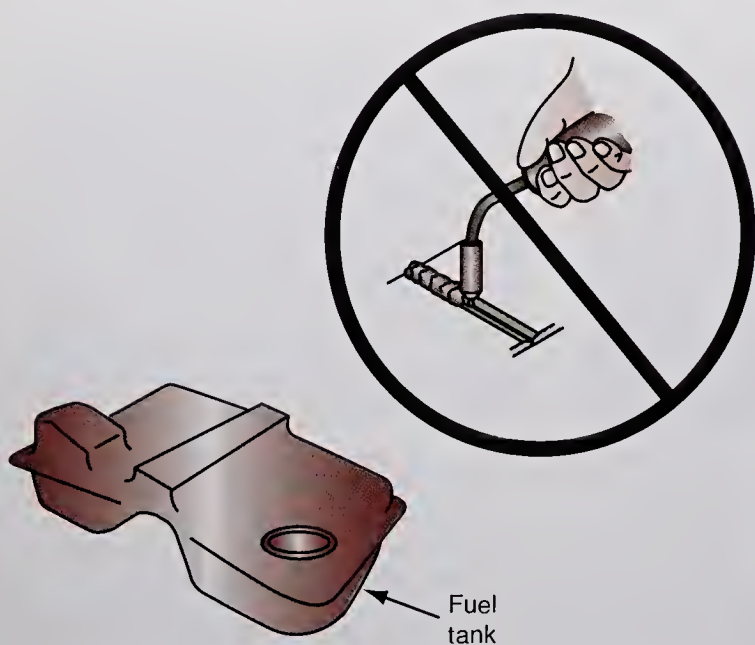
Remove the fuel tank before arc welding on a vehicle.
